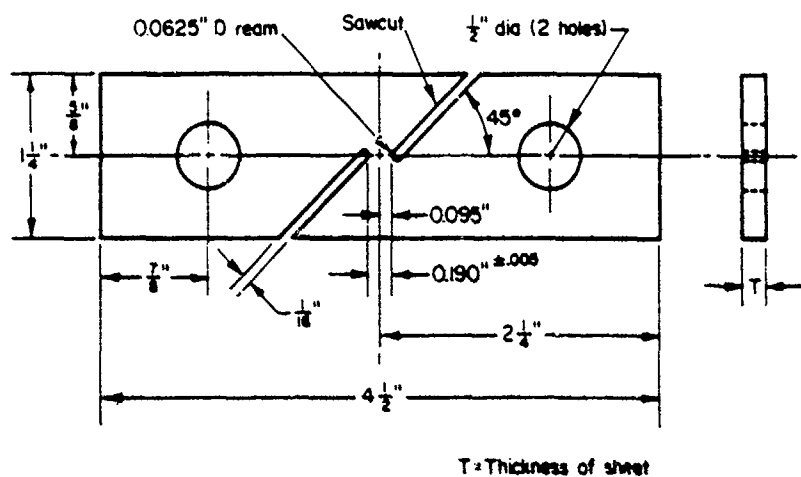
Tension-shear specimen for Inconel 718 sheet.
